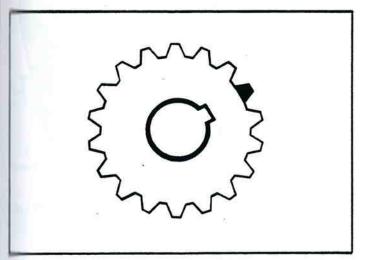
Tooth On Countershaft Drive Gear Directly Over Keyway Marked For Timing.
